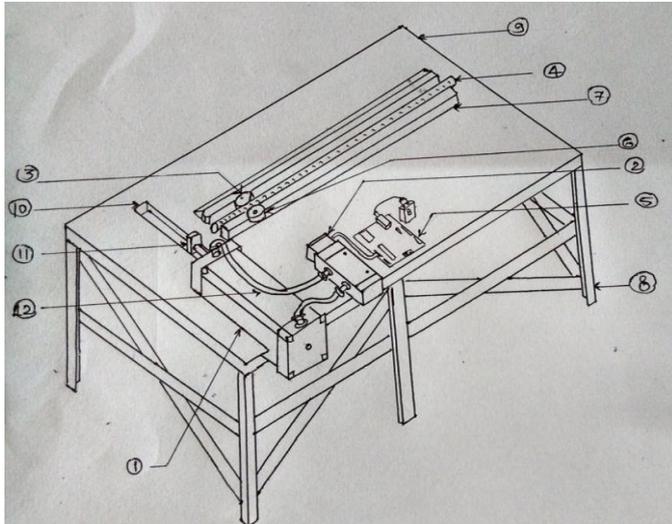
Schematic Layout of Pneumatic Operated Stirrups Making Machine
